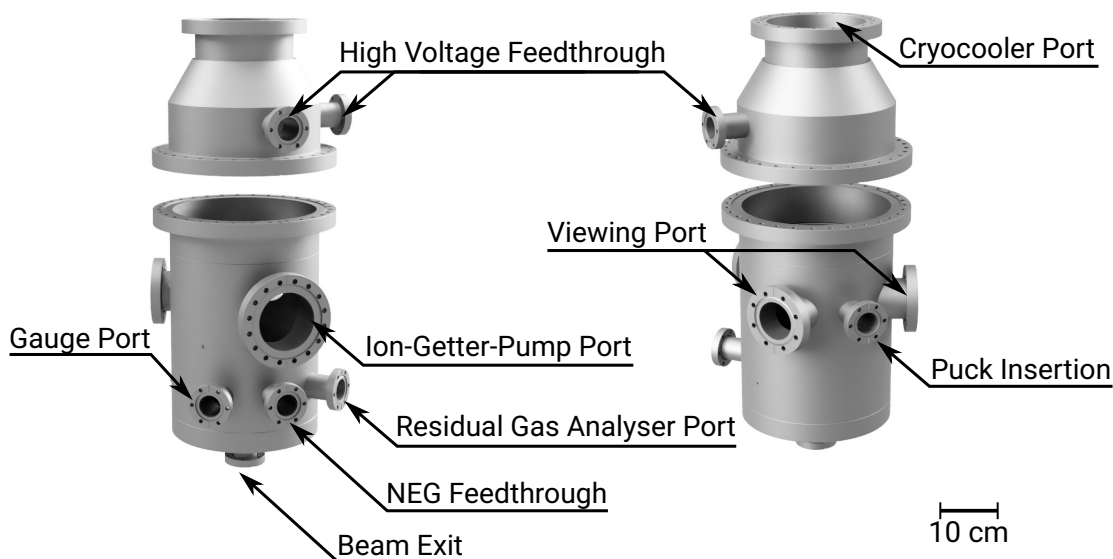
Render of the outer DN250 vacuum chamber of the source. The whole chamber is split into two parts for easier assembly and disassembly. The upper part is equipped with flanges for the cryocooler, the high voltage feedthrough for the electrode and a second feedthrough for the anode. The lower part includes flanges for a vacuum gauge, a residual-gas analyzer, the feedthrough for the NEG activation cables, an exit for the beam, an insertion port for the puck and two viewing ports. 3D file courtesy of [®].
